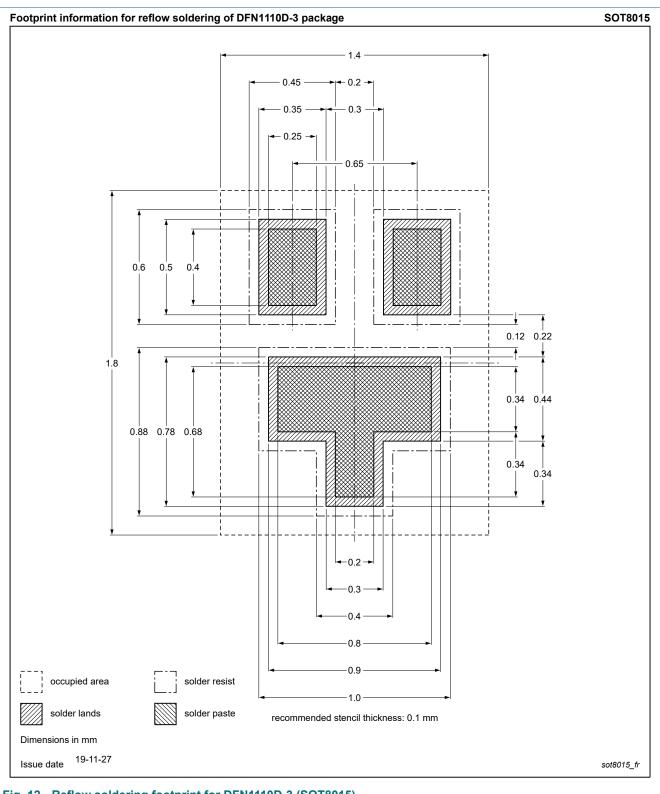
Reflow soldering footprint for DFN1110D-3 (SOT8015)
